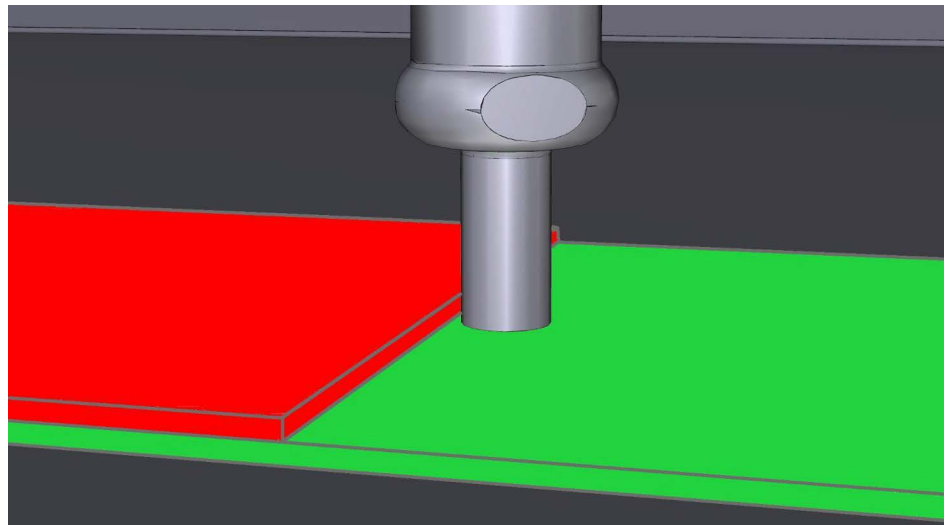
Detailed view: Position adjustment tool with colored surfaces (green = ok / red = not ok)
